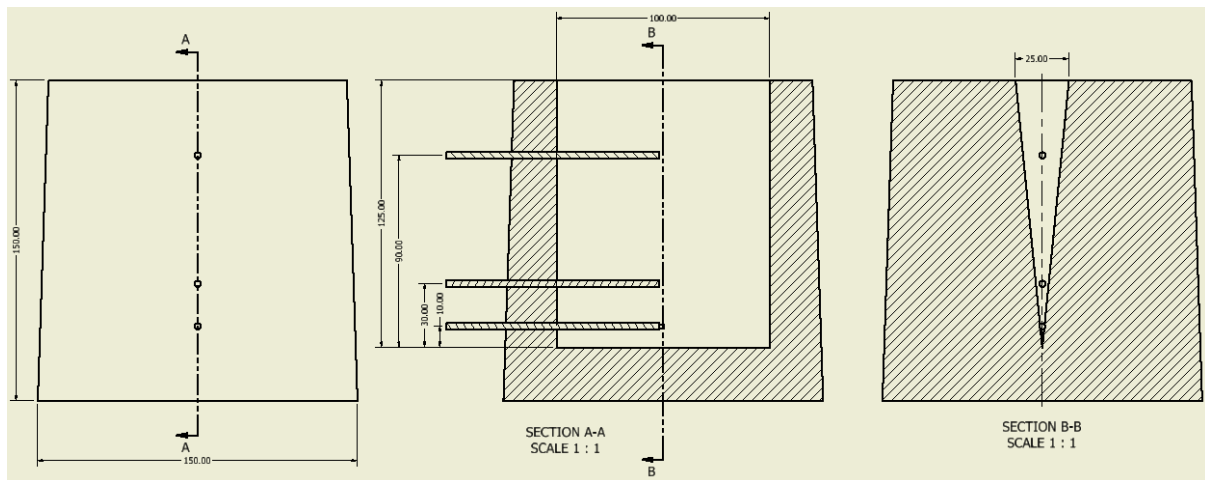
Wedge mould assembly, as used to determine cooling rate function. The same mould was used, without thermocouples, to produce the wedge samples.
